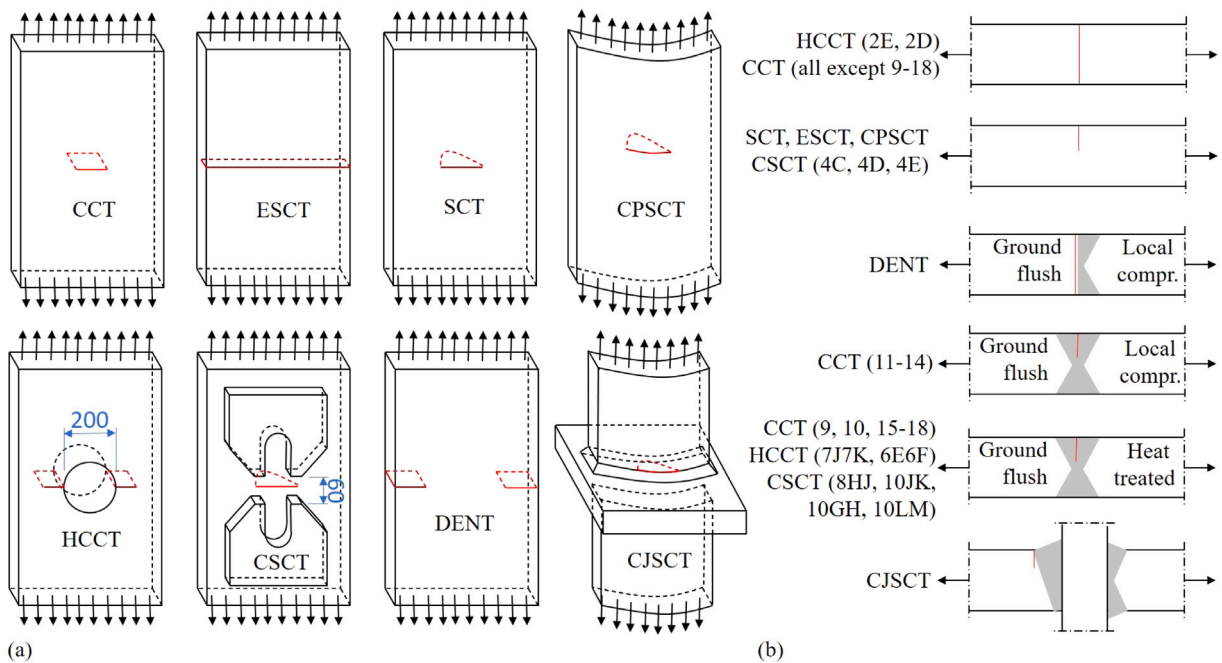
Wide plate specimen: (a) Specimen types; (b) Cross-section with crack (red) relative to weld (grey), if any.
